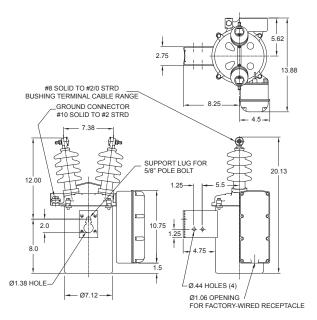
Outline dimensions of 95 kV BIL Type NR oil switch with standard bushings, (15.0 kV Rating only).
